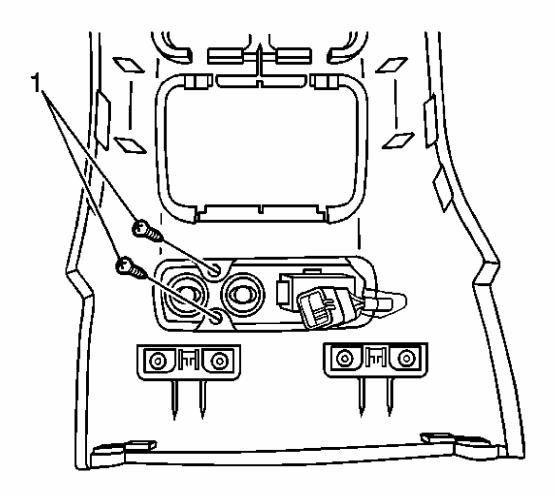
View Of Accessory Outlet Plate Screws Courtesy of GENERAL MOTORS CORP.
